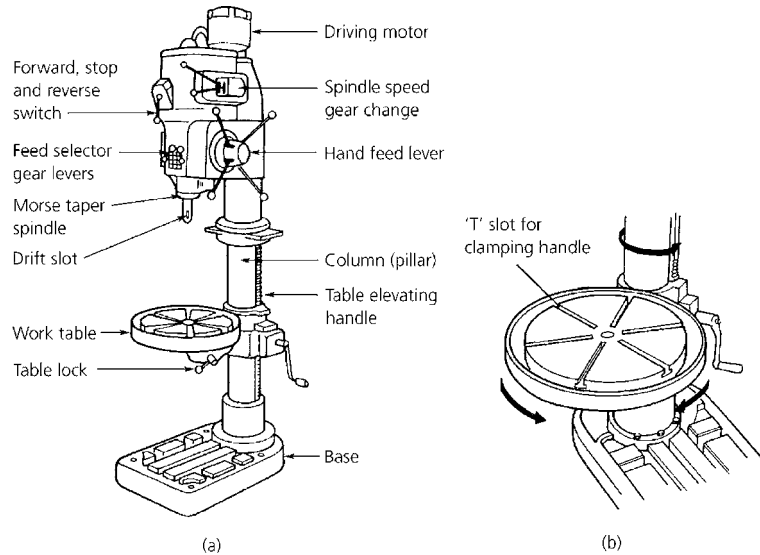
(a) Pillar drilling machine; (b) circular worktable
